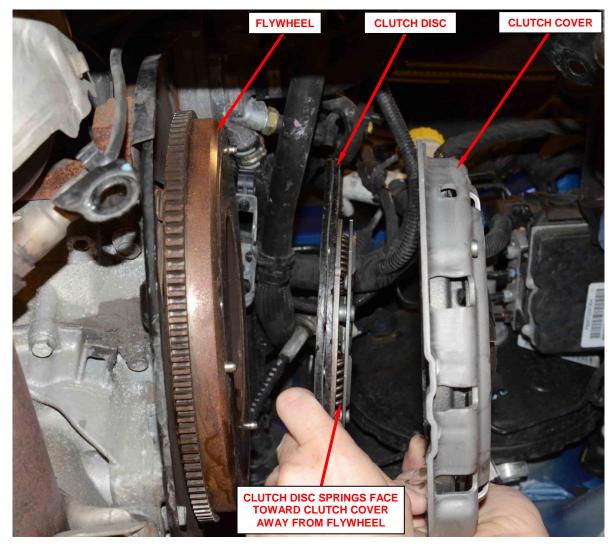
Assemble Clutch Disc and Clutch Cover to Flywheel
